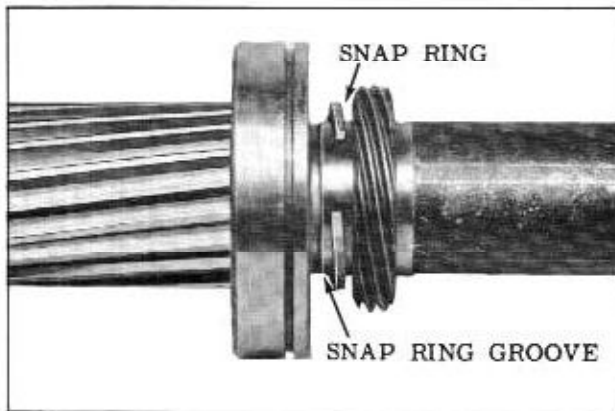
Snap Ring Position Prior to Disassembly of Main Shaft
